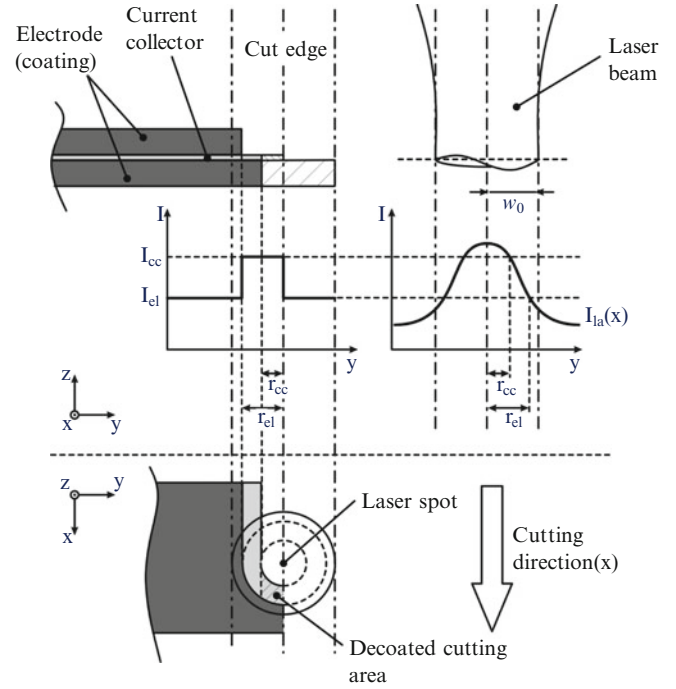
Intensity threshold and cutting edge geometry during electrode laser cutting
